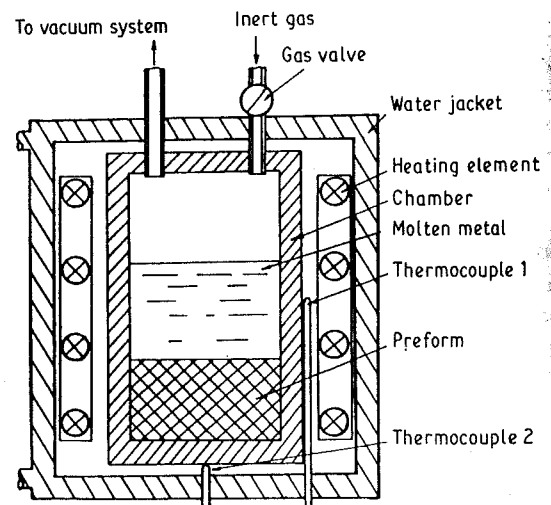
Schematic illustration of the steel mould for making metal-matrix composites by vacuum infiltration of a liquid metal under an inert gas pressure.
